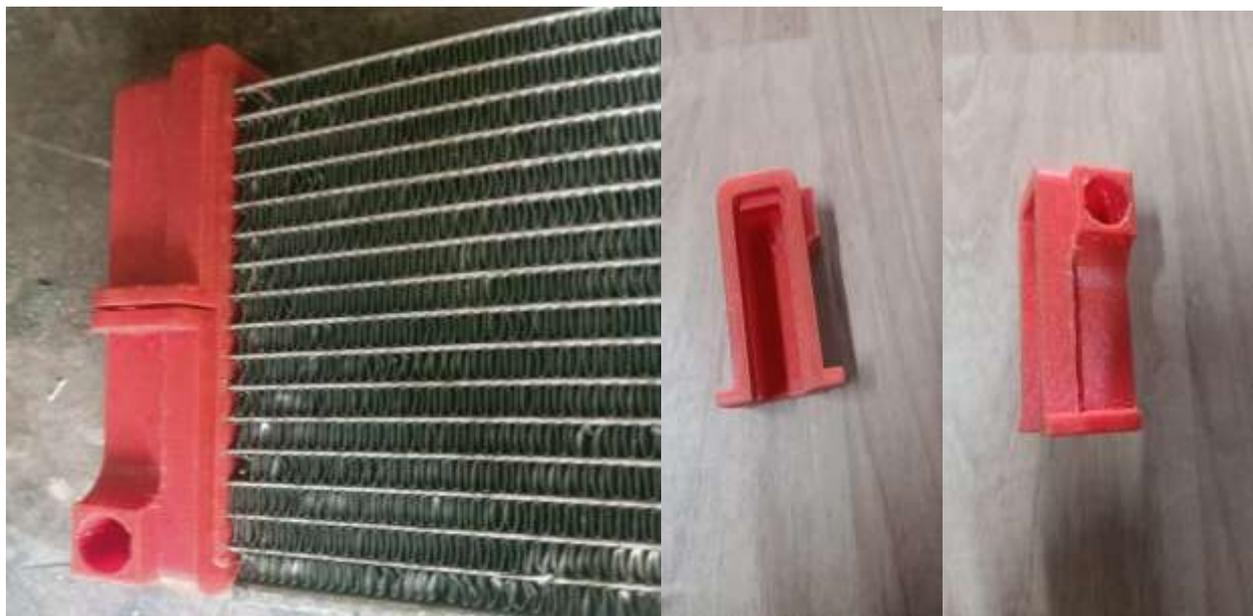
(a) flat plate heat exchanger (b) 3D printed micro-channel fin holder
